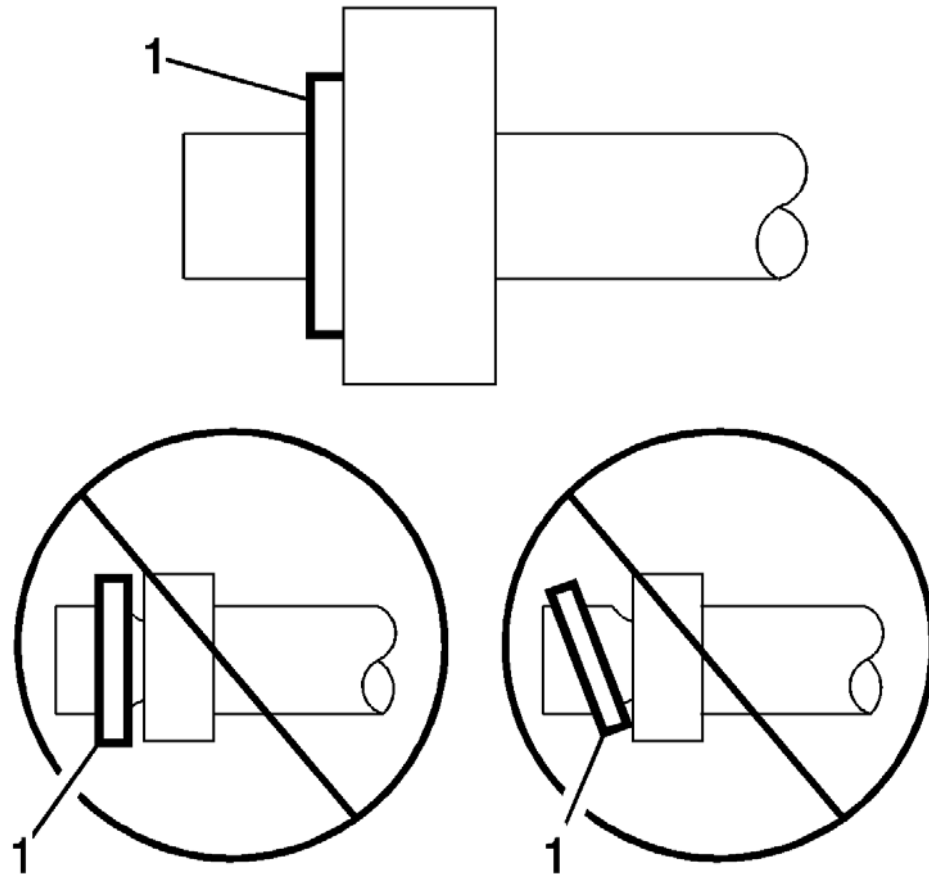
Proper Seating Of A/C Refrigerant O-Ring
